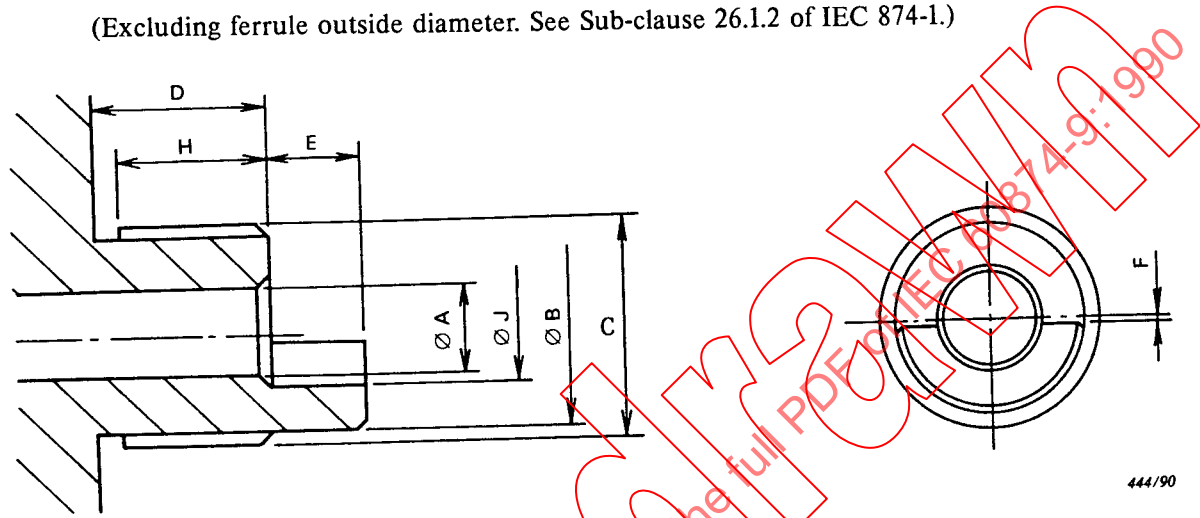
Mechanical intermateability measurement gauge for a plug (dimensions given in Table 3)
